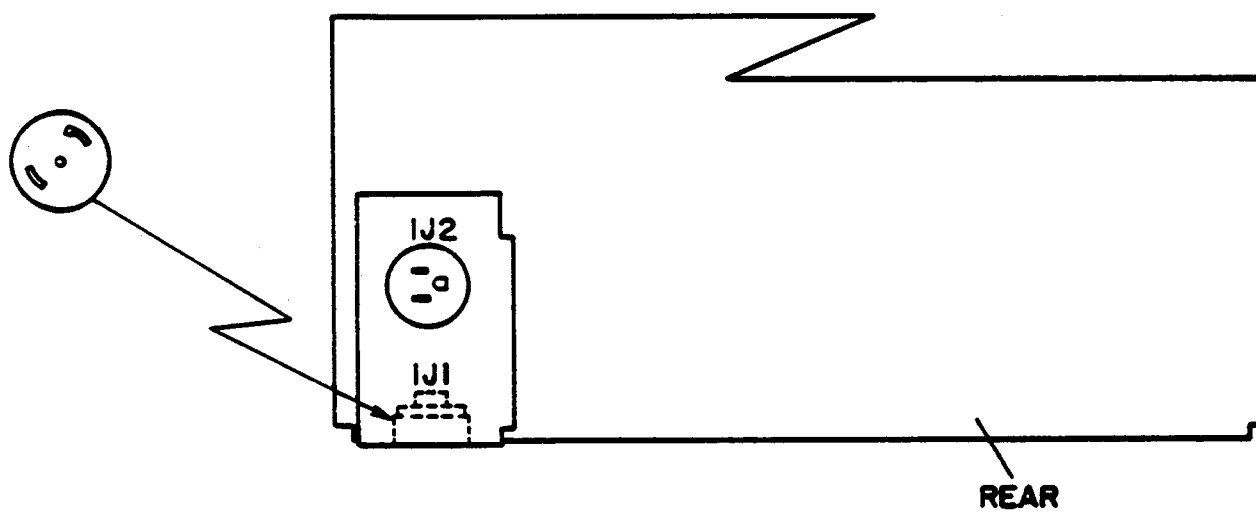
TEST ASSEMBLY REAR CONNECTIONS
